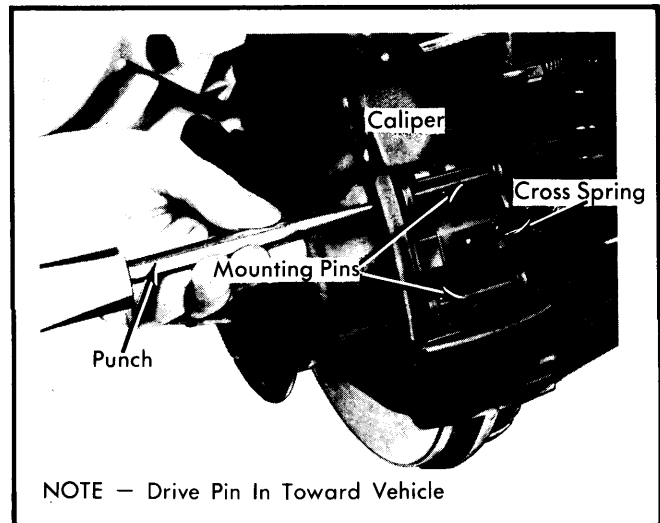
Knocking Out Disc Pad Mounting Pins On Teves Model Brakes
